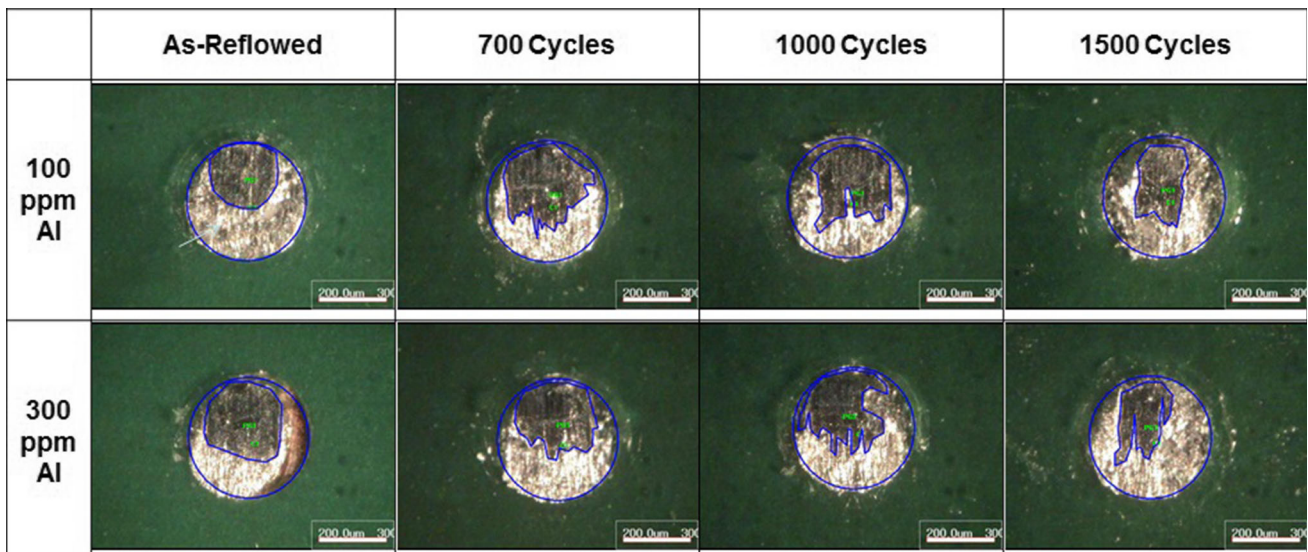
Stereo micrographs of the fracture surface after shear strength tests of alloys 1 and 2 solder ball joints.
